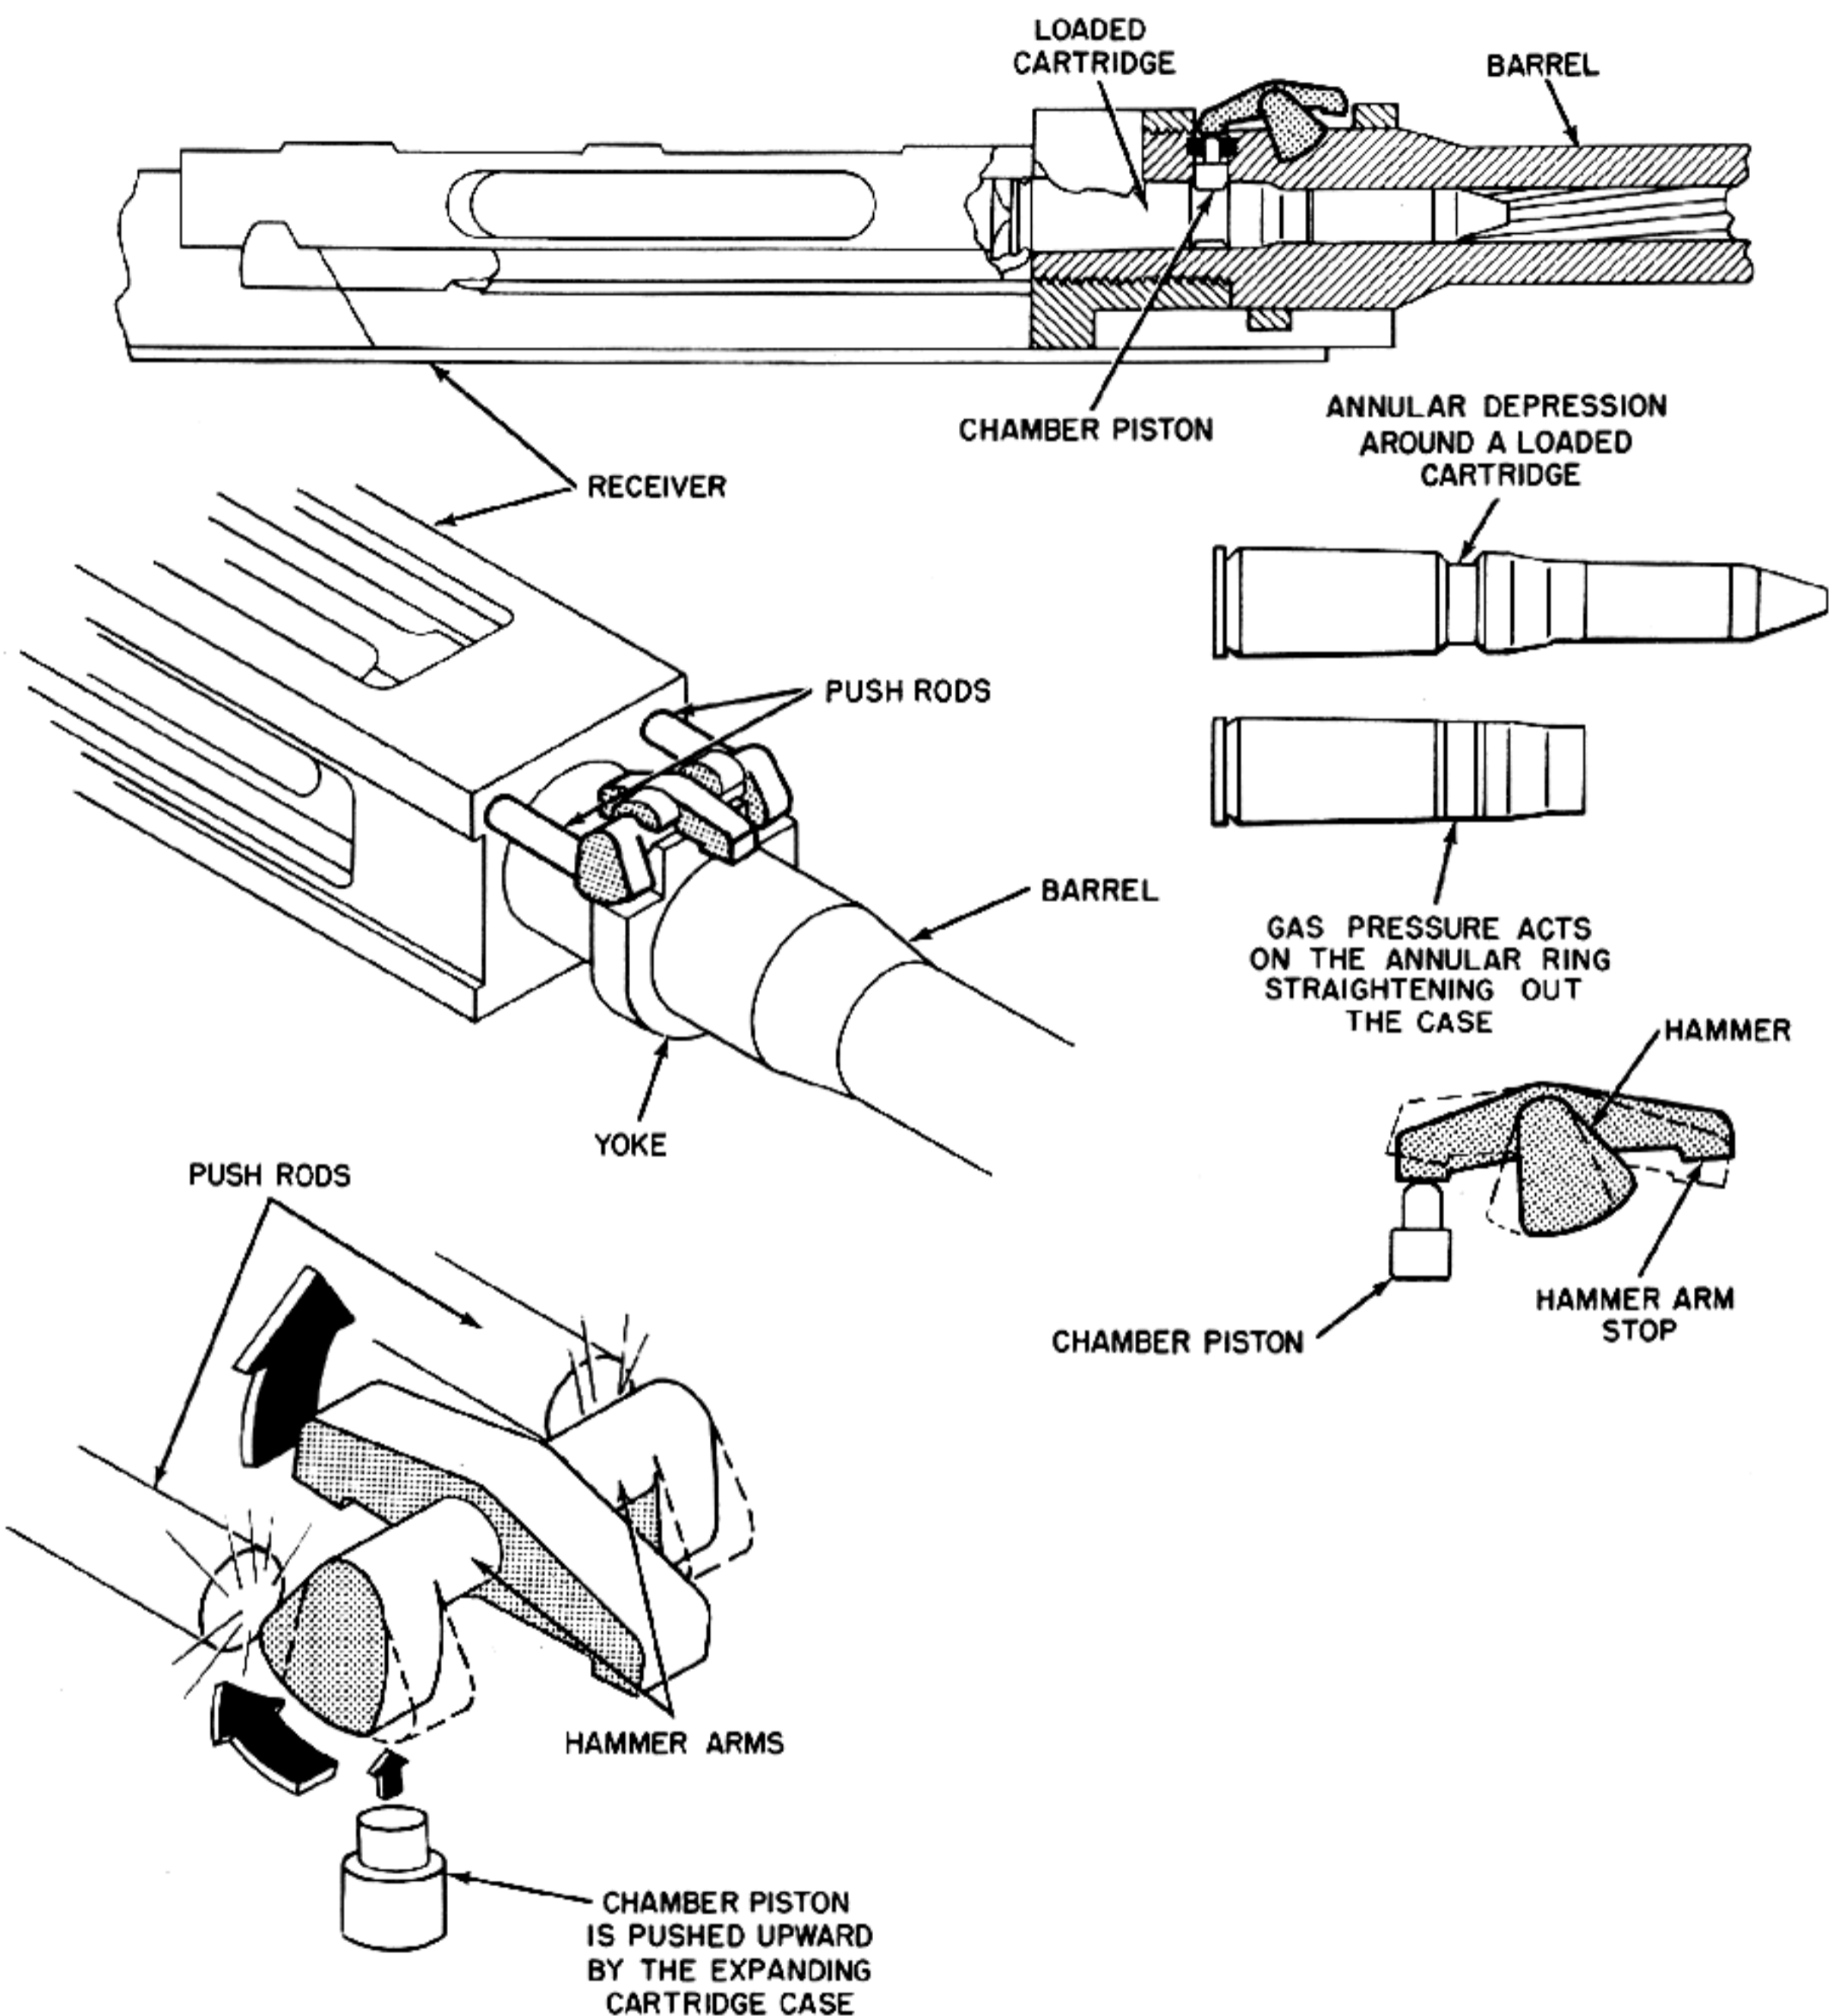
Expansion of Cartridge Case Operates Bolt Unlocking Mechanism.
